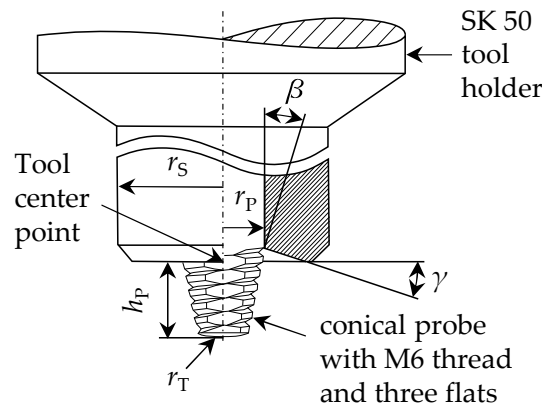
Tool geometry with the most important dimensions (adapted from Bachmann et al. [23]).
